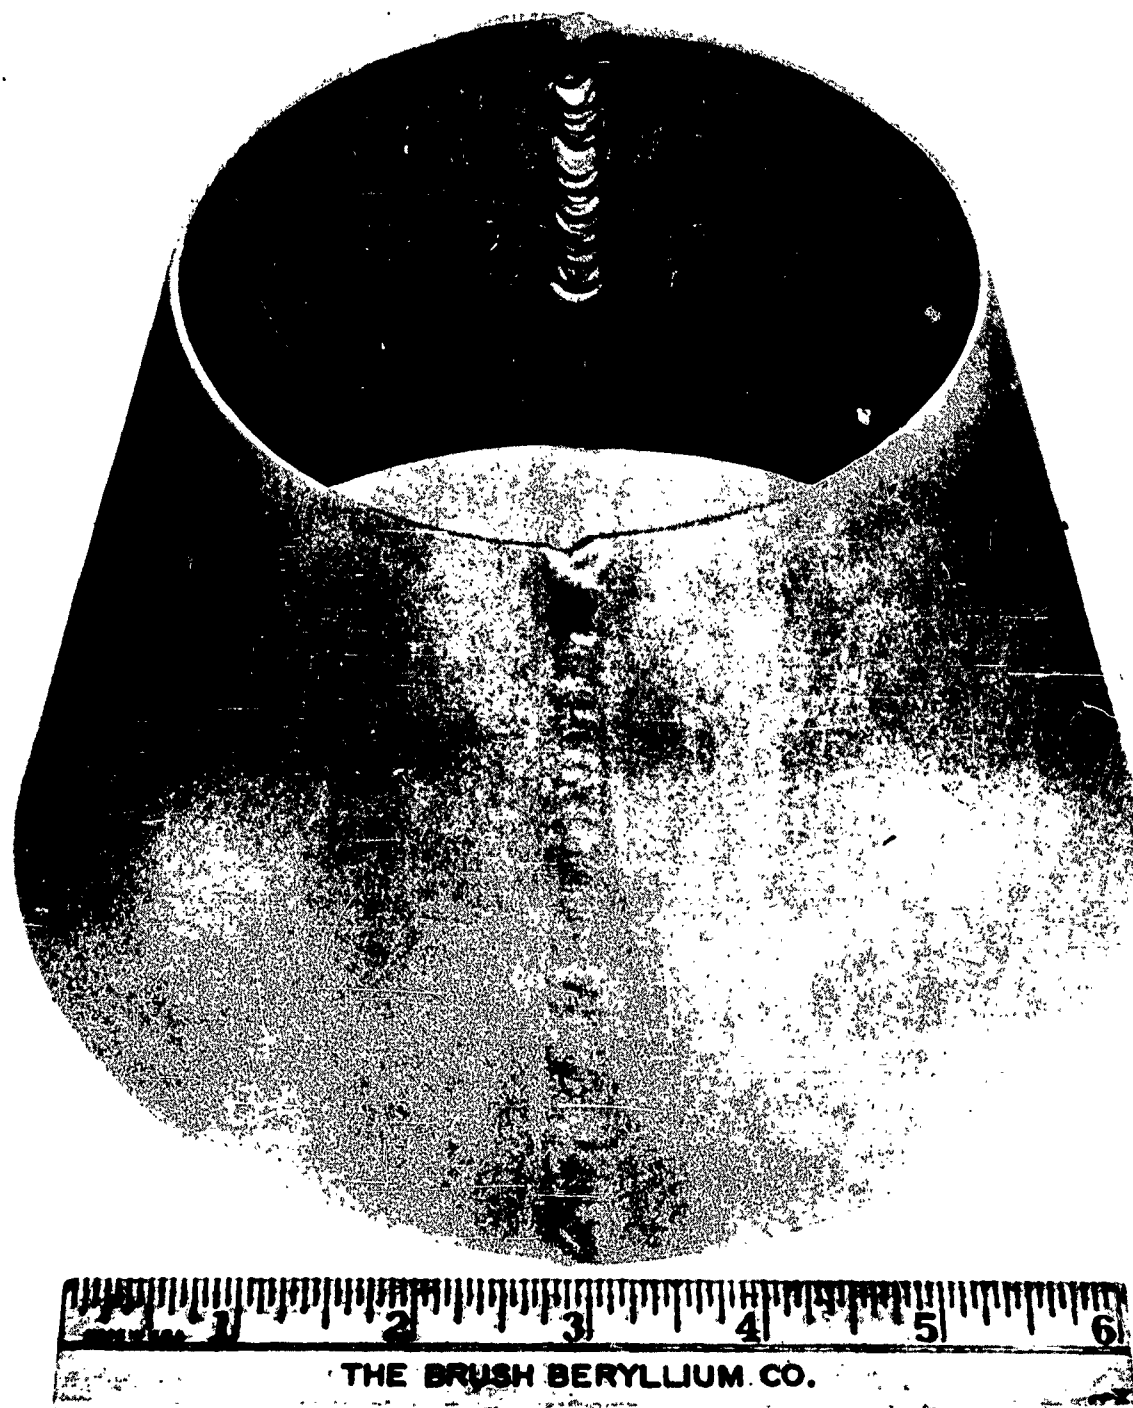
Truncated Cone Made by Roll Forming and Welding with Beryllium Filler Rods
